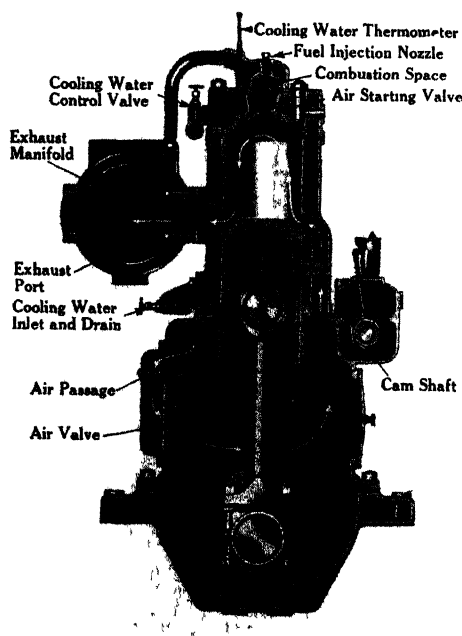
Transverse Section Through Fairbanks-Morse Marine Engine
